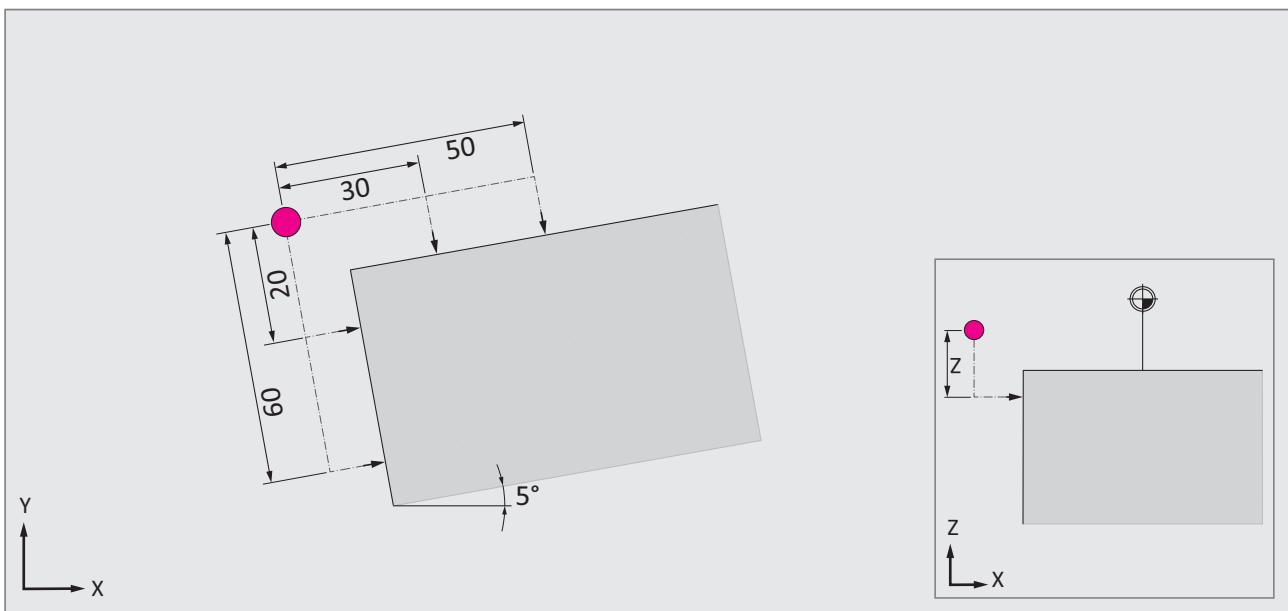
Determining the corner point – outside corner with pre-positioning in Z
